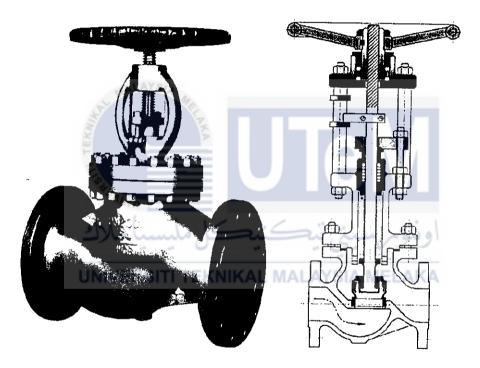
Globe Valve (Globe Valve Types and Parts - A Complete Guide, 2020)
